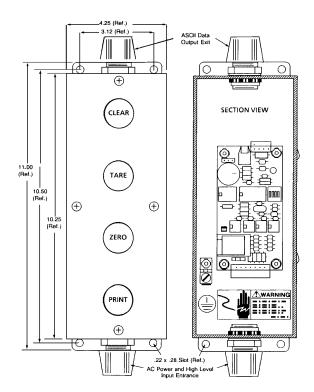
Mild Steel or Stainless Enclosure Versions
